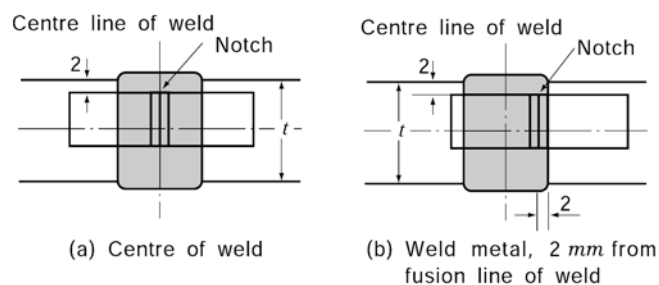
Position of Impact Specimen (Unit : mm, t = Plate thickness)
